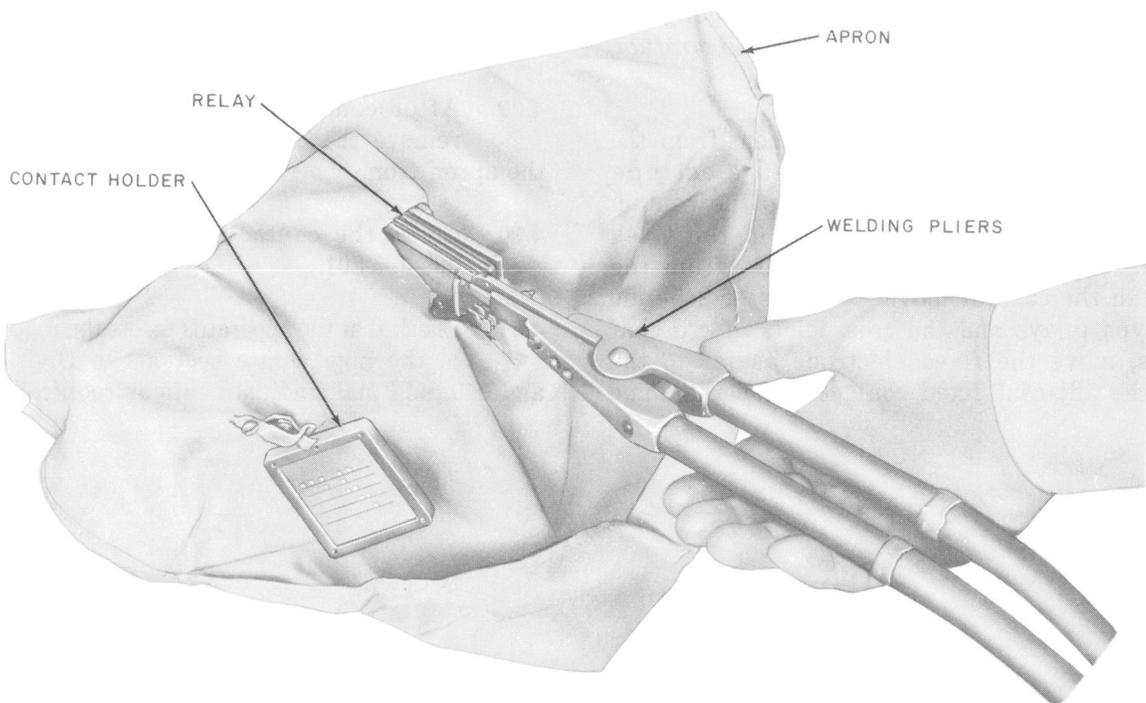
Welding Pliers in Position for Welding Contact
